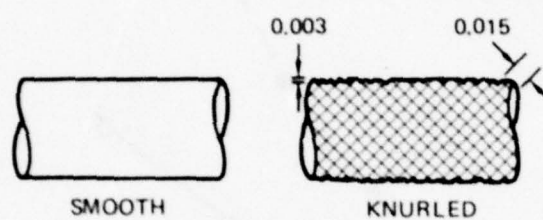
Smooth and Knurled Cylinders Used for Tests on a Foil with a Trailing-Edge Rotating Cylinder
